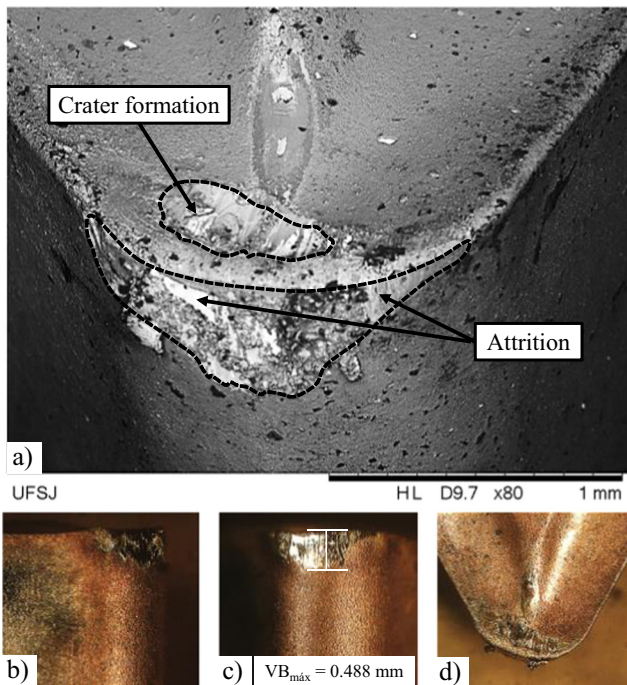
Cutting tool with $VB_{max} = 0.488$ mm used in turning with cold air system, with cutting speed of 600 m/min. a SEM. b Clearance surface. c Tip. d Rake surface
